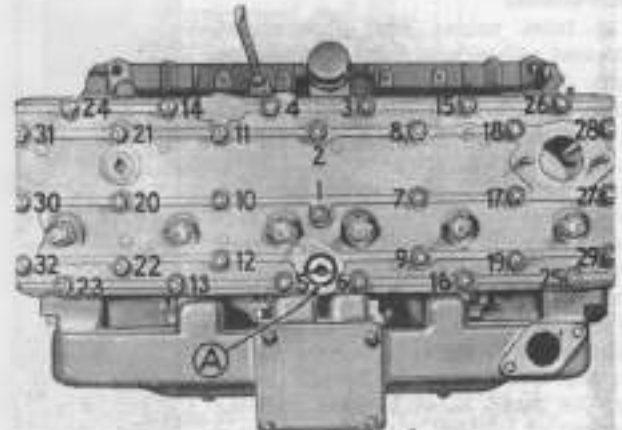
Chrysler 6-cylinder head screw tightening sequence.
